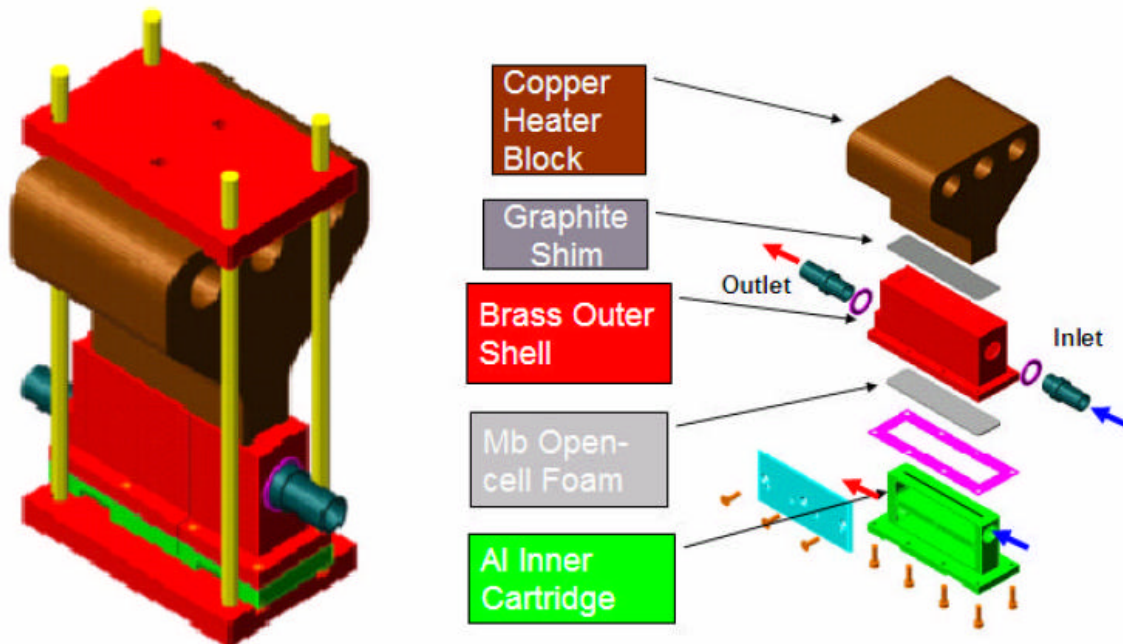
Schematic of the assembled HCFP test section (left) and exploded view (right).
